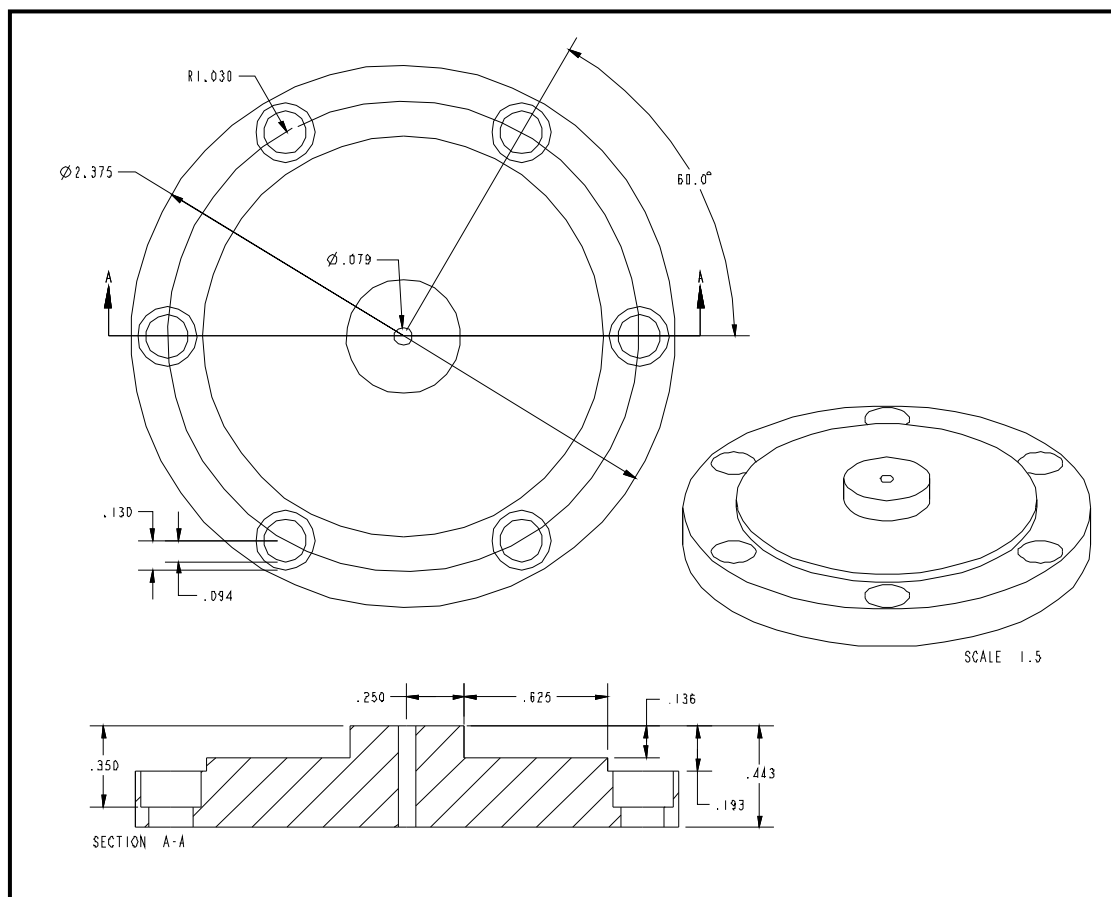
CAD Drawing of the Single, 2 mm, Straight Channel, Centered Jet Nozzle Block used for the 1st Generation Injector (Filename: firstgen2mm.drw).
